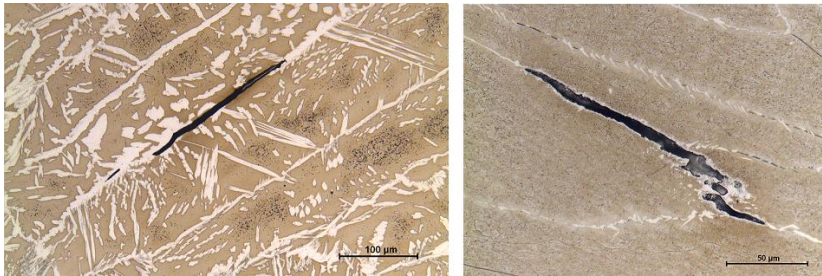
Hot cracks in hybrid (left) and laser welds (right) in 22%Cr duplex stainless steel. The energy input was 0.6 kJ/mm and 0.1 kJ/mm for the hybrid weld and the laser weld, respectively.
